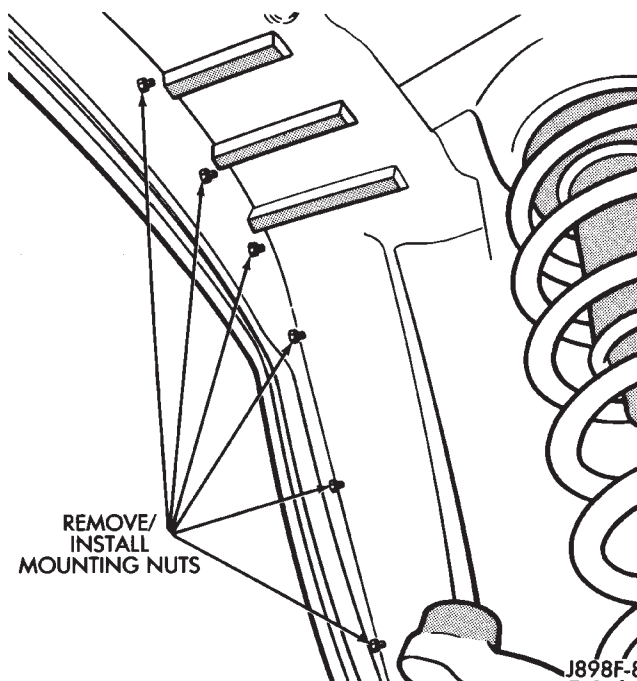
Fender Inner Splash Panel Remove/Install - XJ
